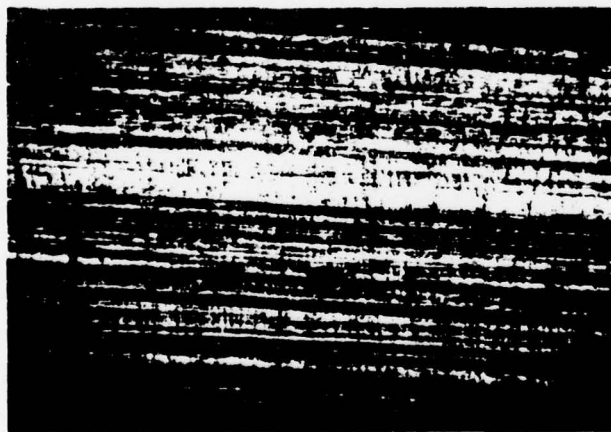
Test Results - Linear Mechanism - Cast Iron/Steel Specimen.
